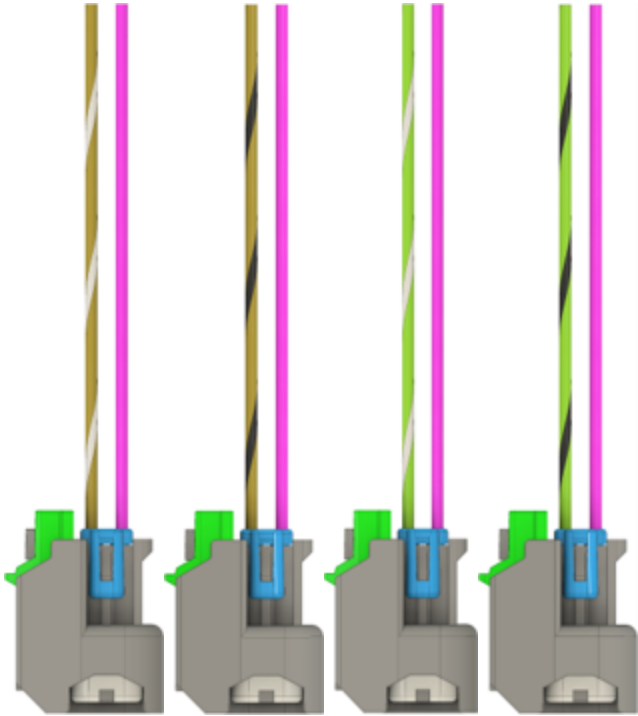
Fuel Injectors 5-8 DBC & DBW Connector View
